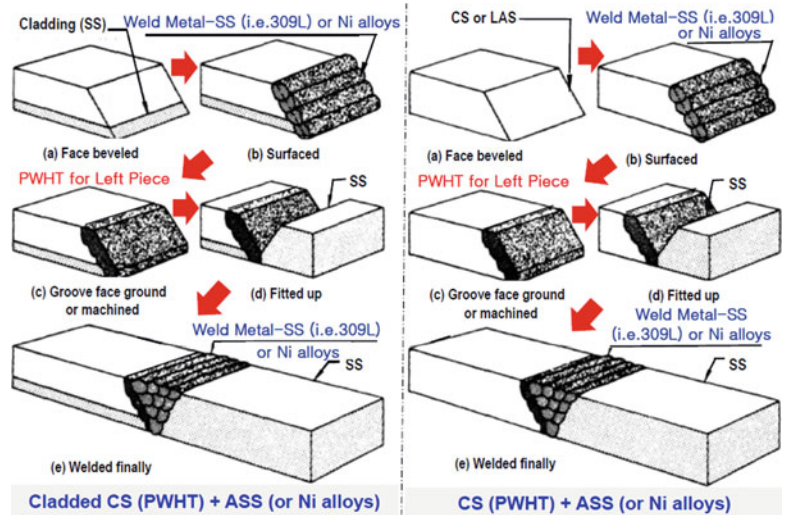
Typical sequence of buttering welding. (Source: ASM SS H/B)
